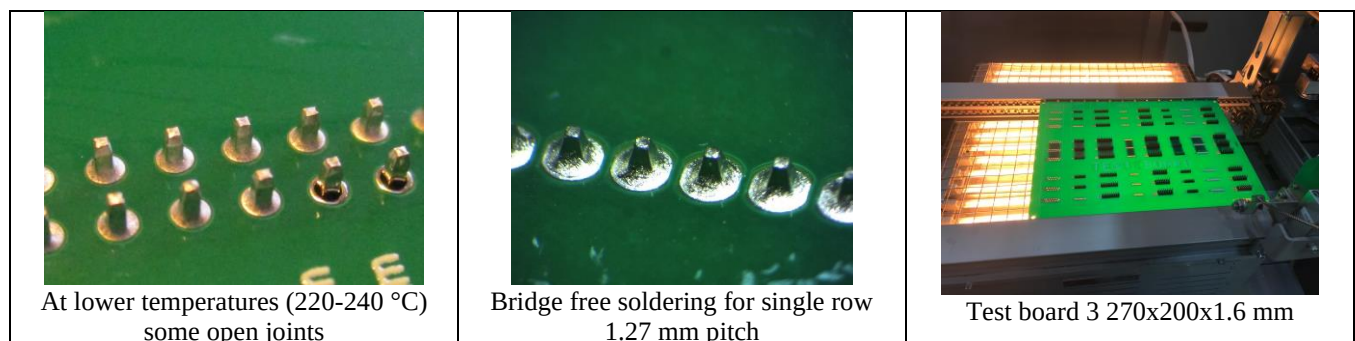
Soldering on fine pitch test board 3 (1.27, 1.50, 2.00-, and 2.54-mm pitch)
